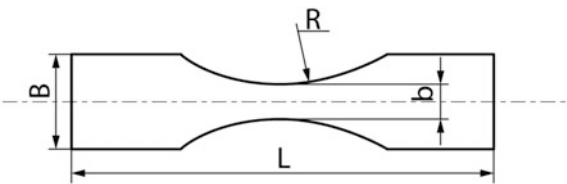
The orientation of the test specimens and the welded joints for the experiments
